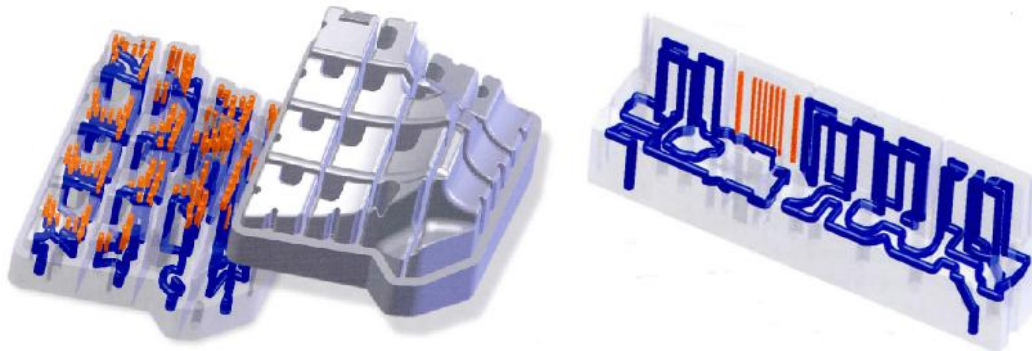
The mold for producing a liquid-cooled engine [3] ; Figure 6 : Electronic Parts from ABS [3]
